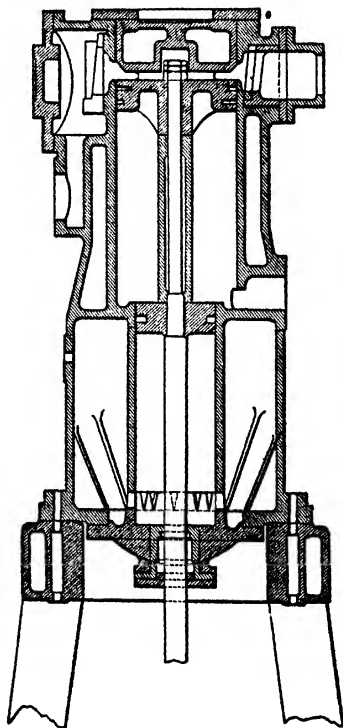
Cylinder of Leavitt steam stamp. Vertical section.
